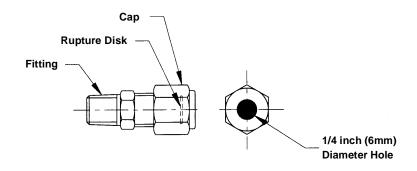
LINCOLN ST. LOUIS BLOW-OUT FITTING ASSEMBLY
